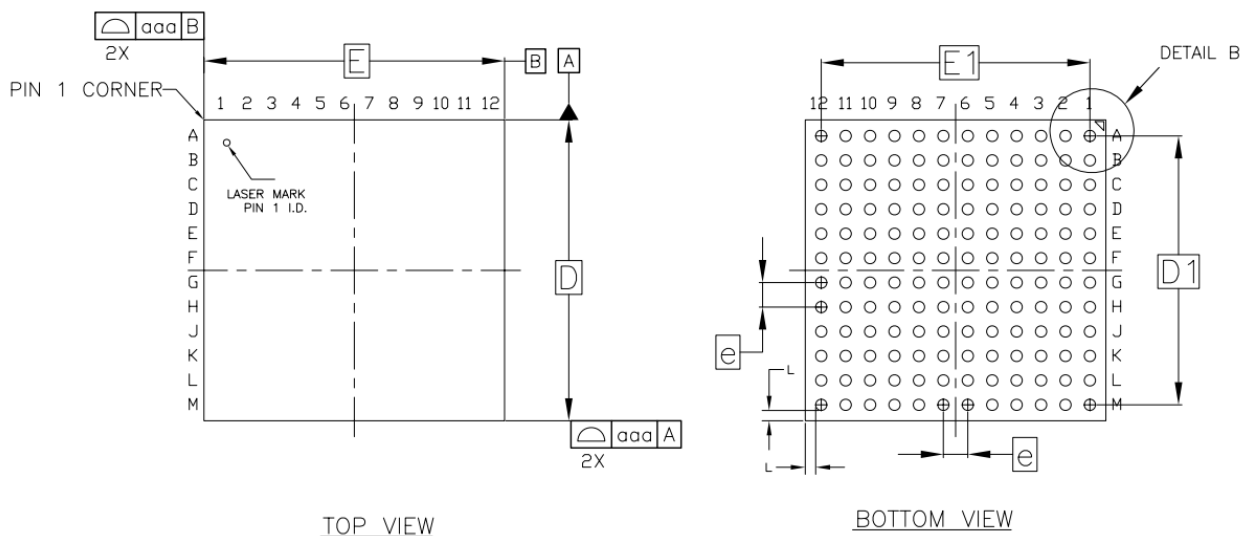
RK628D WBBGA144 Package Top View and bottom View
